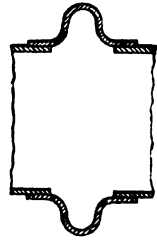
BOWLING HOOP EXPANSION JOINT.
